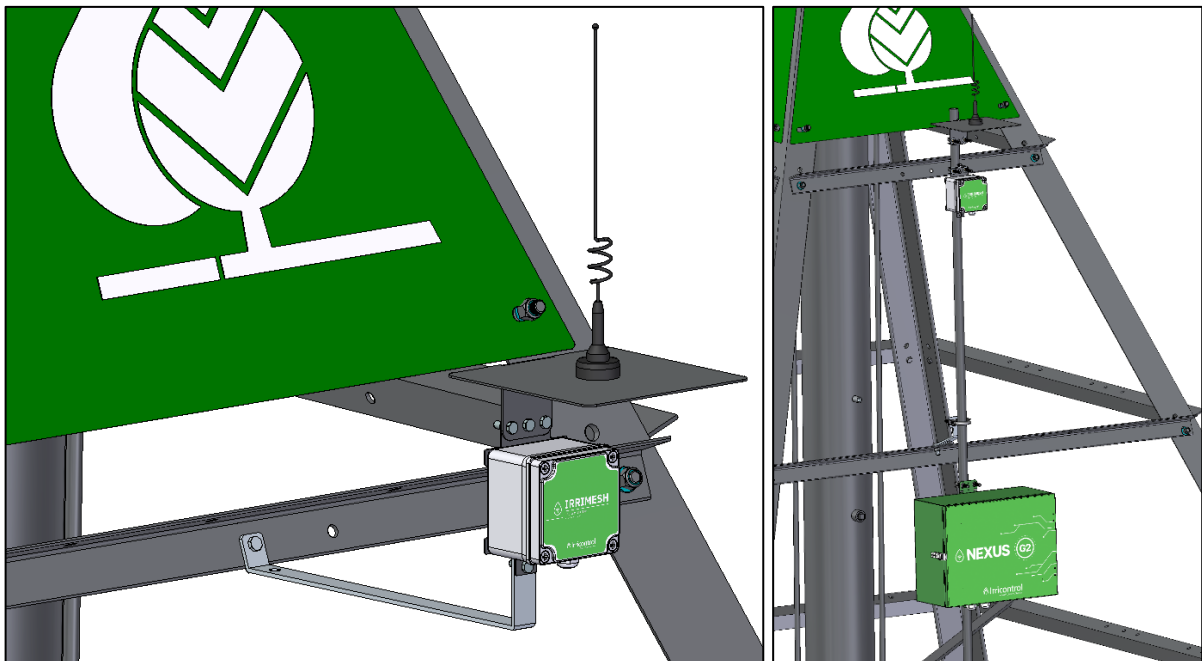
Irrimesh installation on the pivot's central tower - Bauer and multi-brand pivots.
